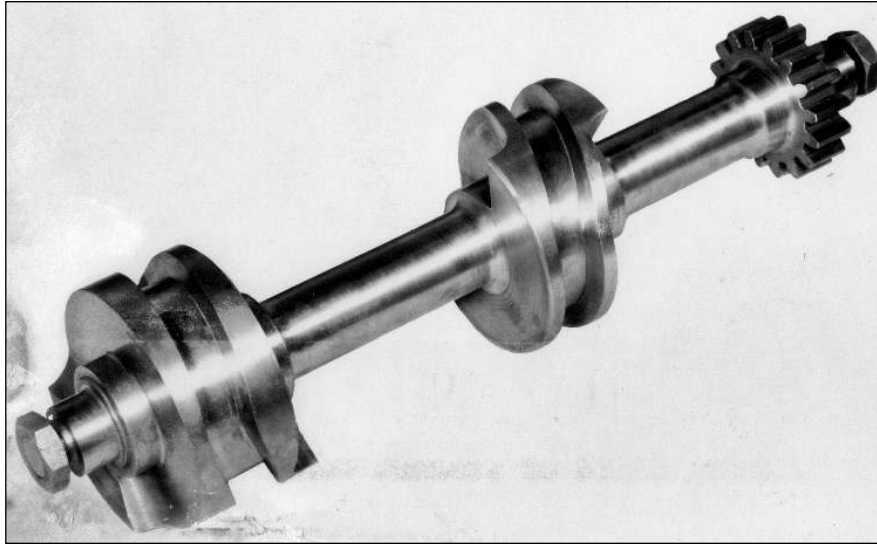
Cossart Control shaft Barrel cam for movement of nuts along the thread to adjust the cam cut off.
